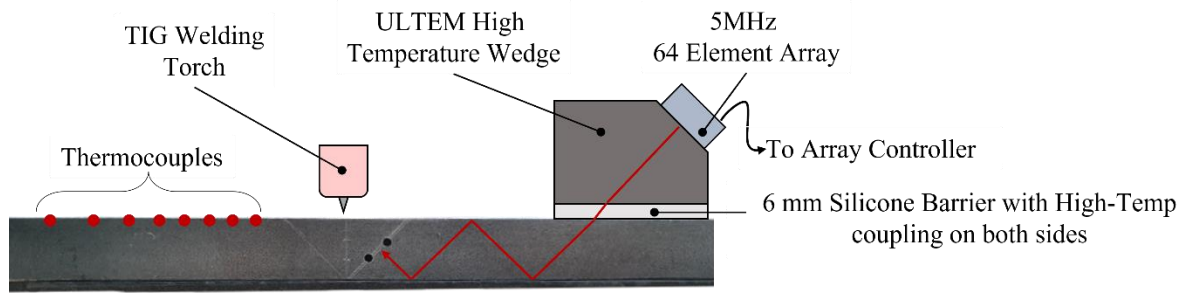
Experimental setup depicting the approximate location of the thermocouples, weld torch, polymer coupling medium, ultrasonic wedge, and array on top of the carbon steel component.
